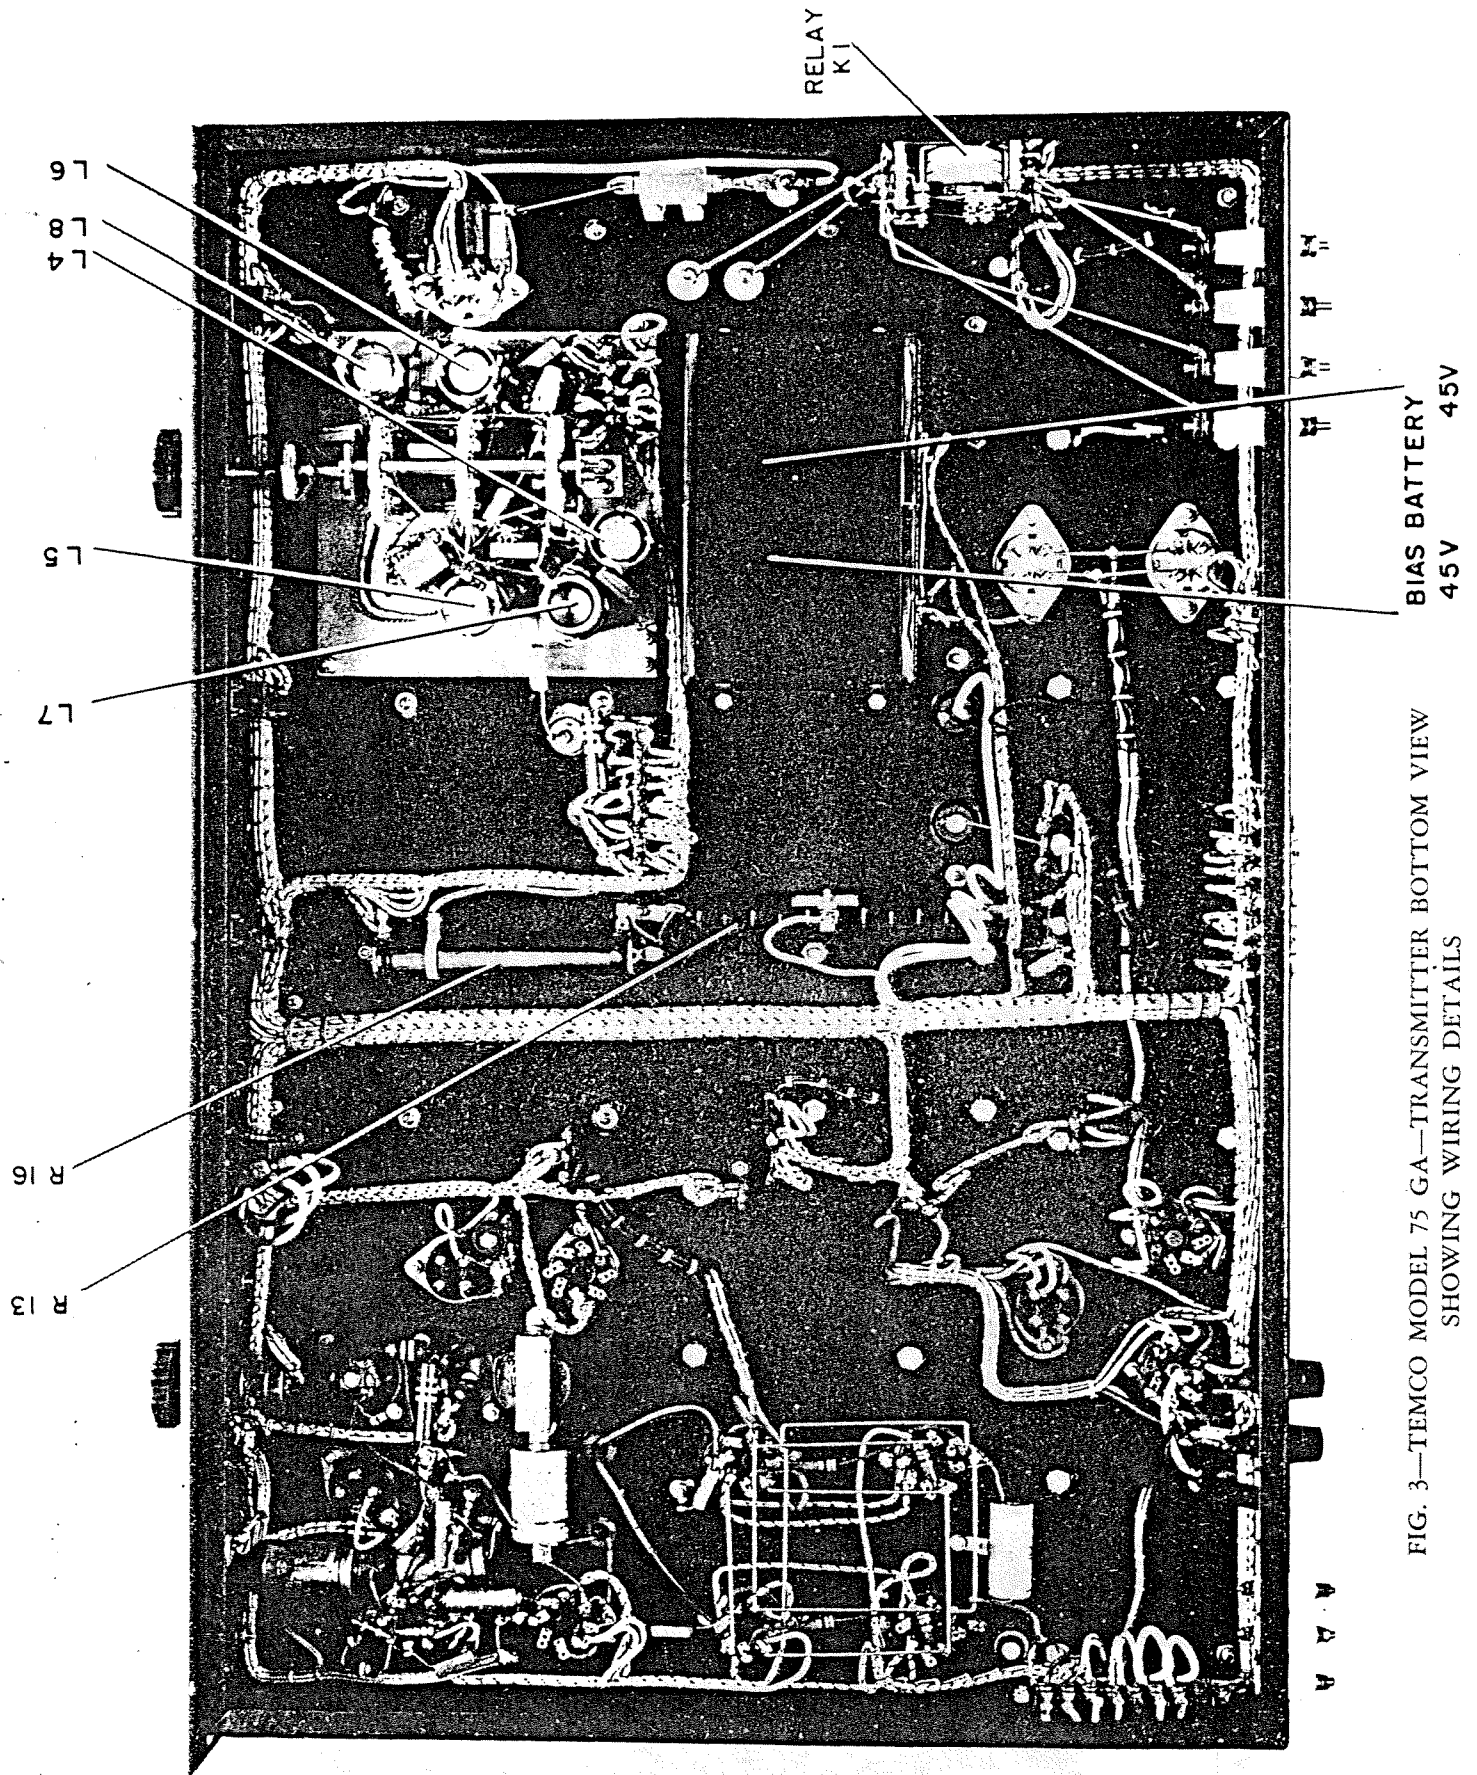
TEMCO MODEL 75 GA—TRANSMITTER BOTTOM VIEW
